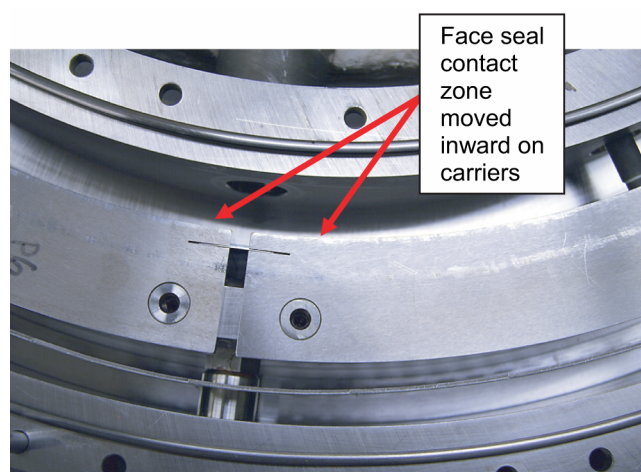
Photo of two adjacent seal carriers and flexure seal showing face seal contact zone (minor scuffing marks) shifted near the inner diameter of the seal carriers. E-seal replaced with trial seal: monofilament behind the face seal.
